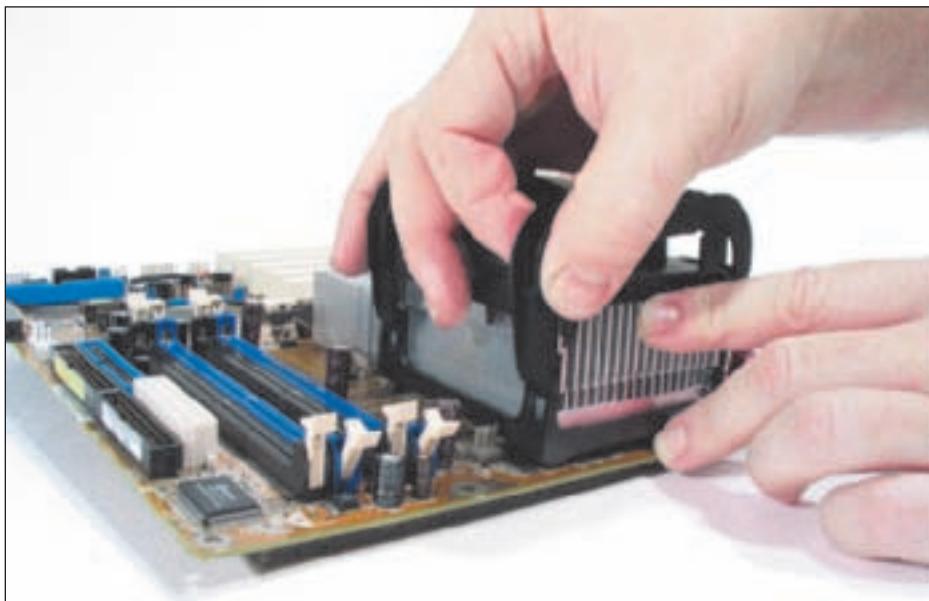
Carefully push the cooler assembly clips into the retention mechanism on the motherboard until they snap into position
